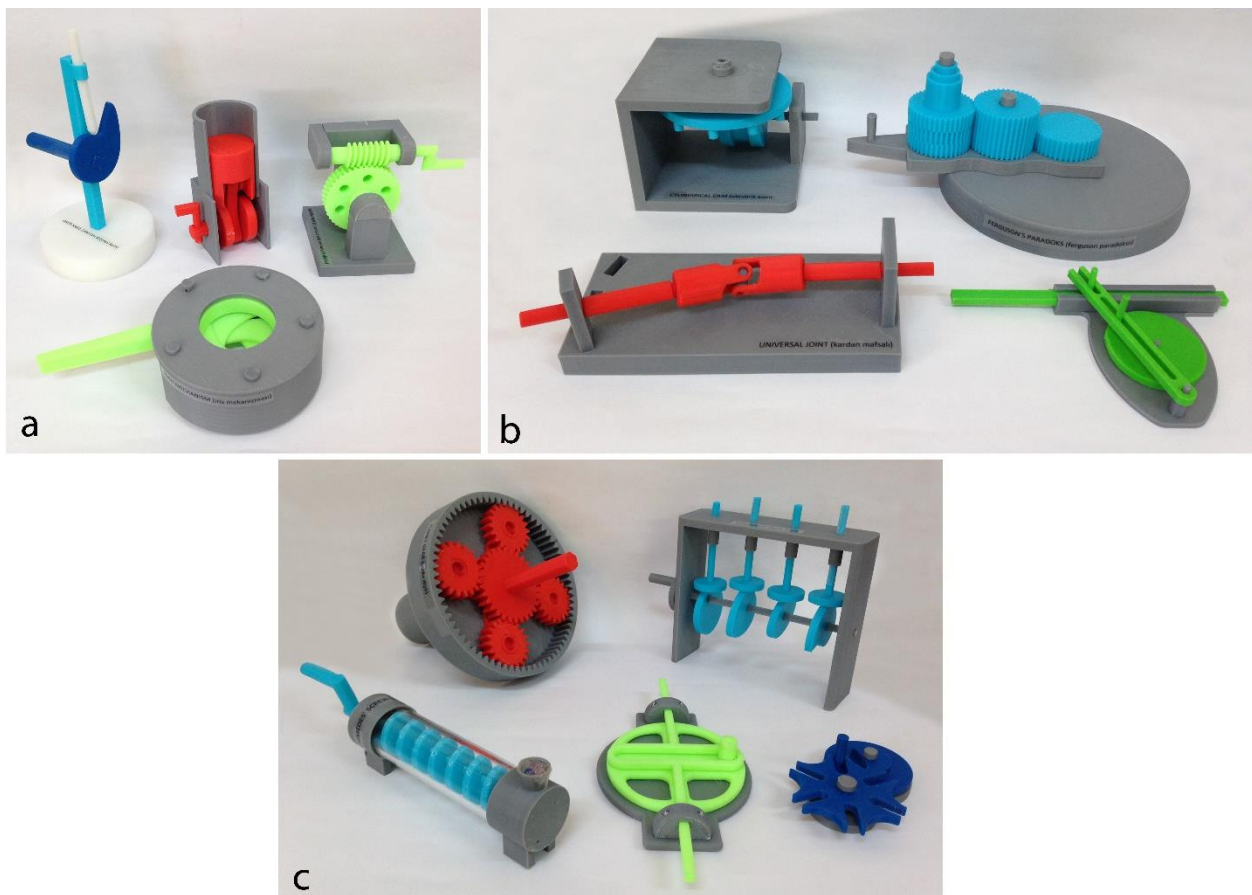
Teams' final 3D printed mechanism models a) Drop Camshaft, Crankshaft-Rod, Worm Wheel, Iris Diaphragm b) Cylindrical Cam, Ferguson's Paradox, Universal Joint, Withworth Mechanism c) Planet Gear, Camshaft, Archimedes' Screw, Scotchyoque, Geneva Drive
